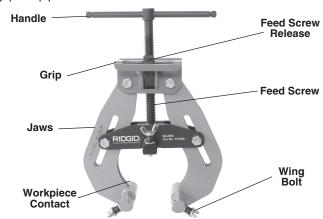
Quick-Acting Pipe Welding Clamp
